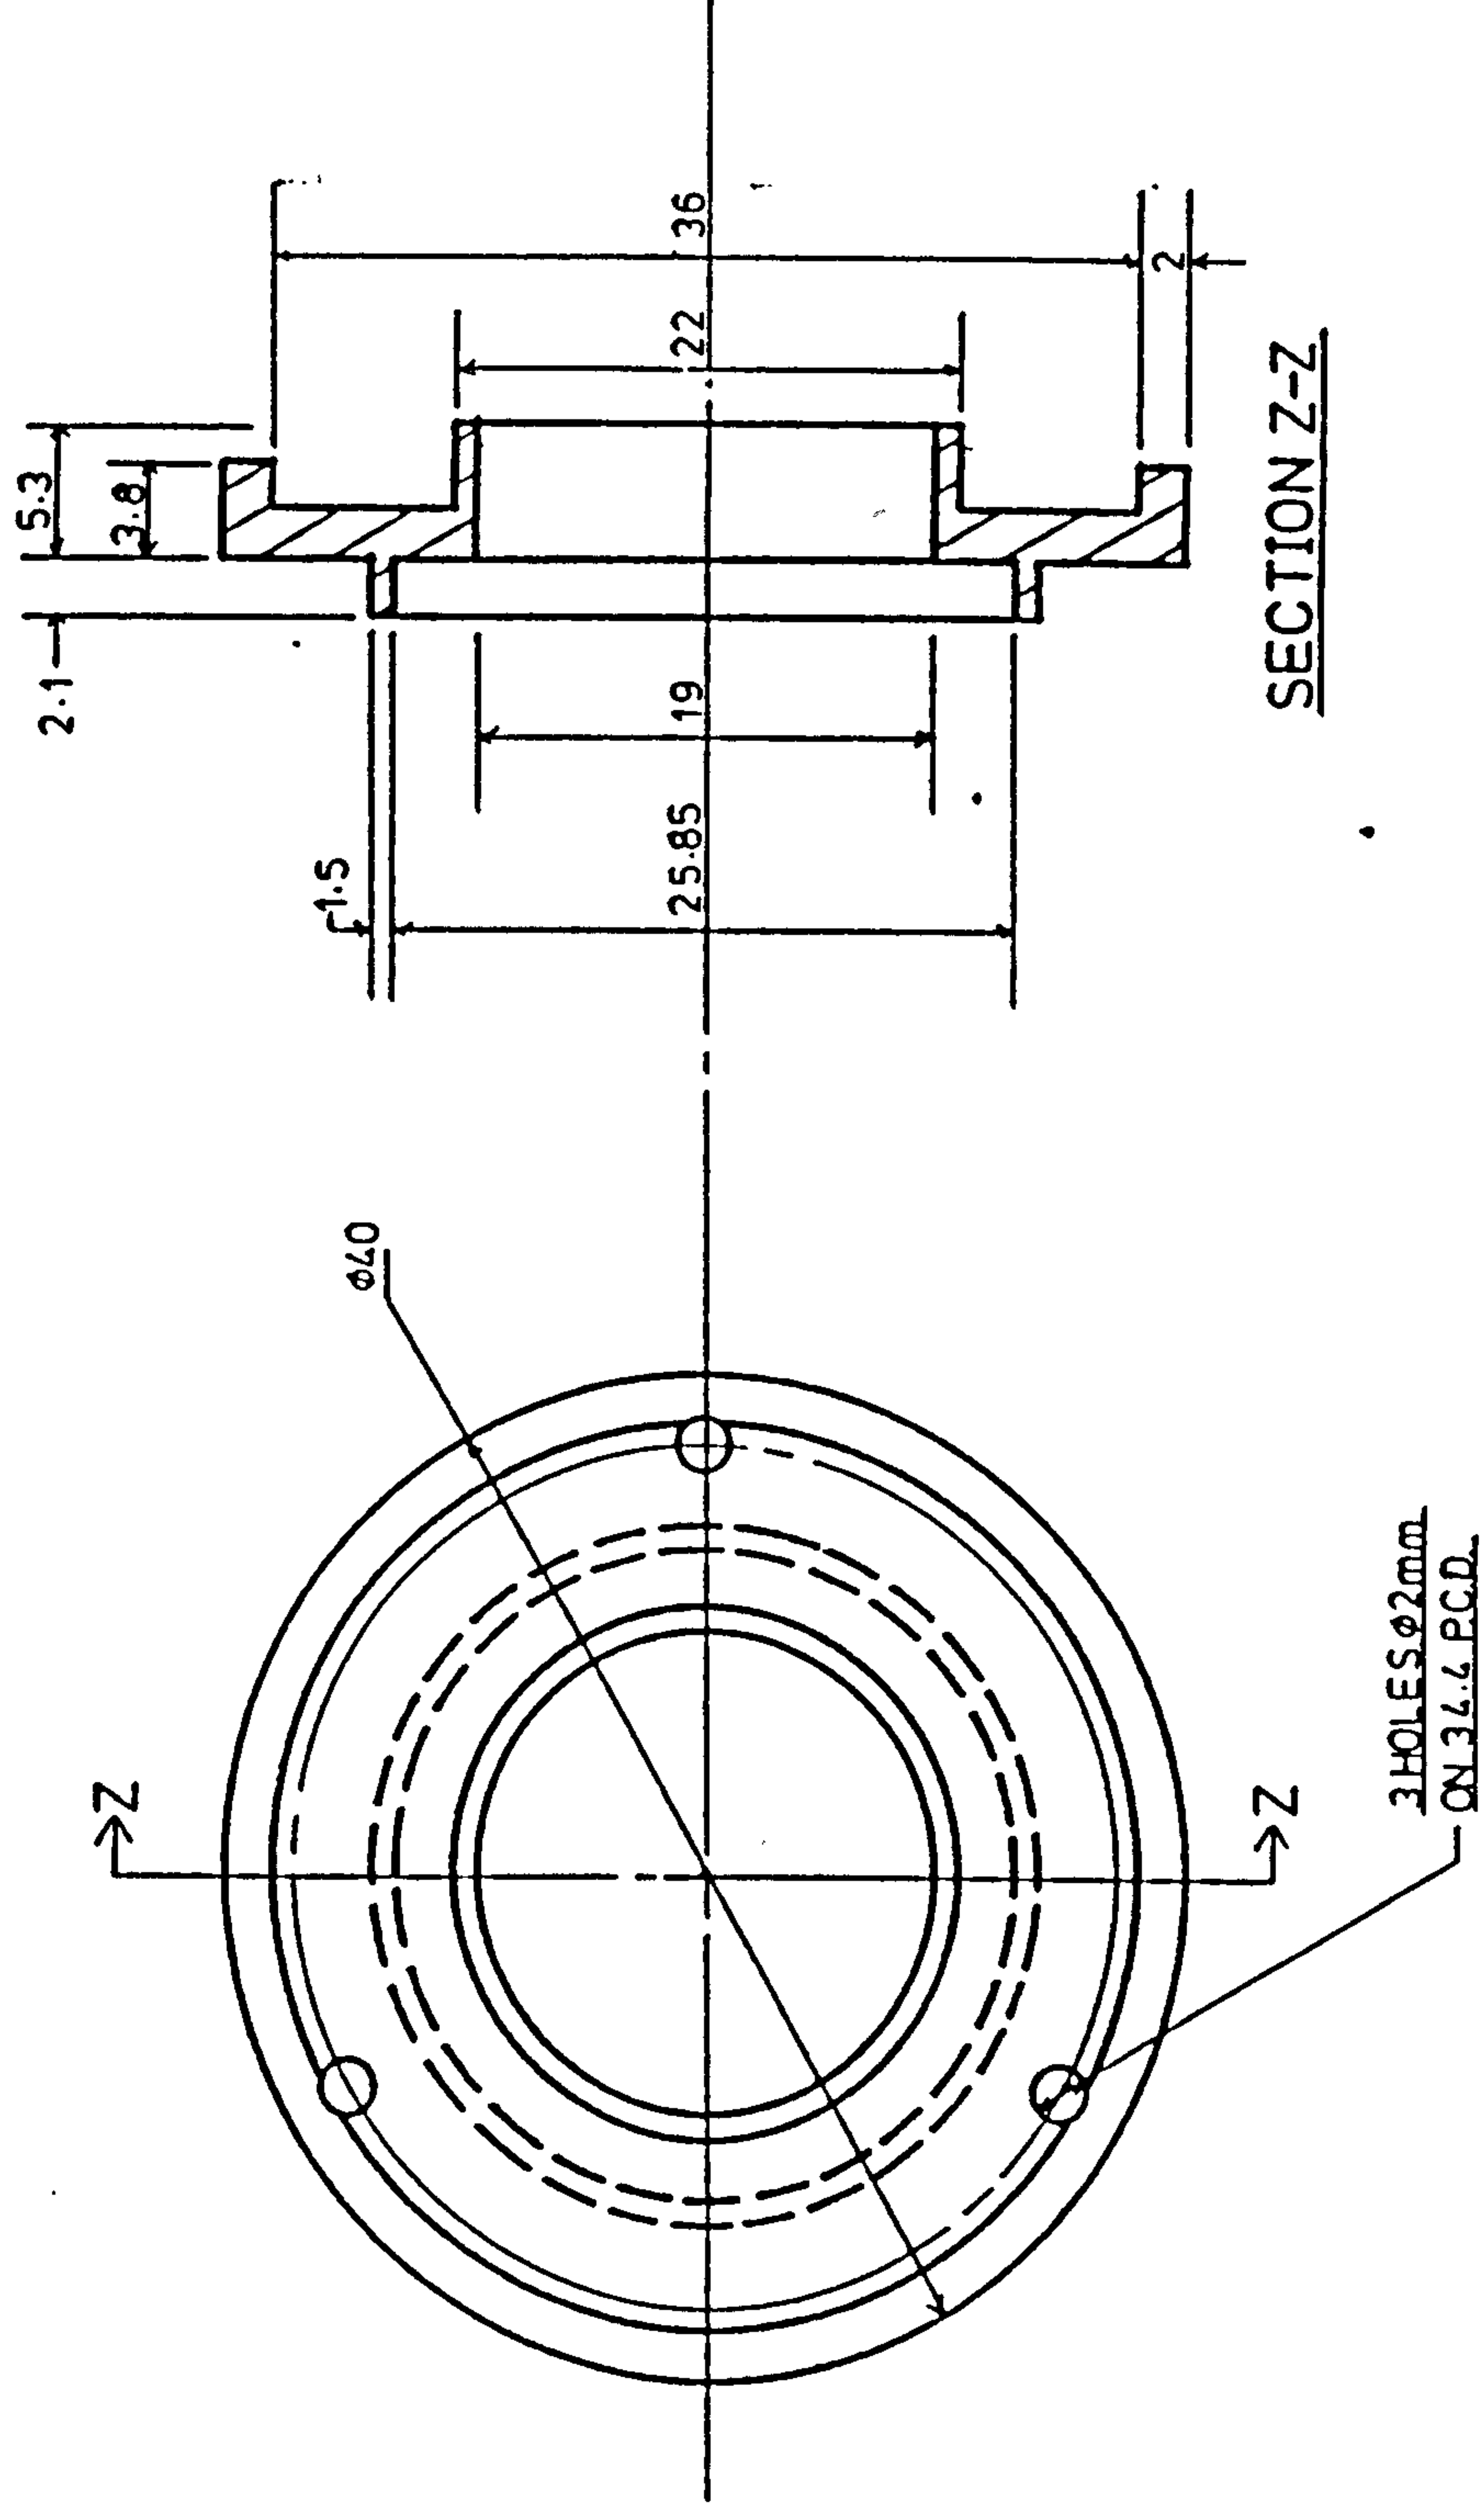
COLLAR MOULDING FOR DIFFUSION MODE SENSOR MOUNTING.
